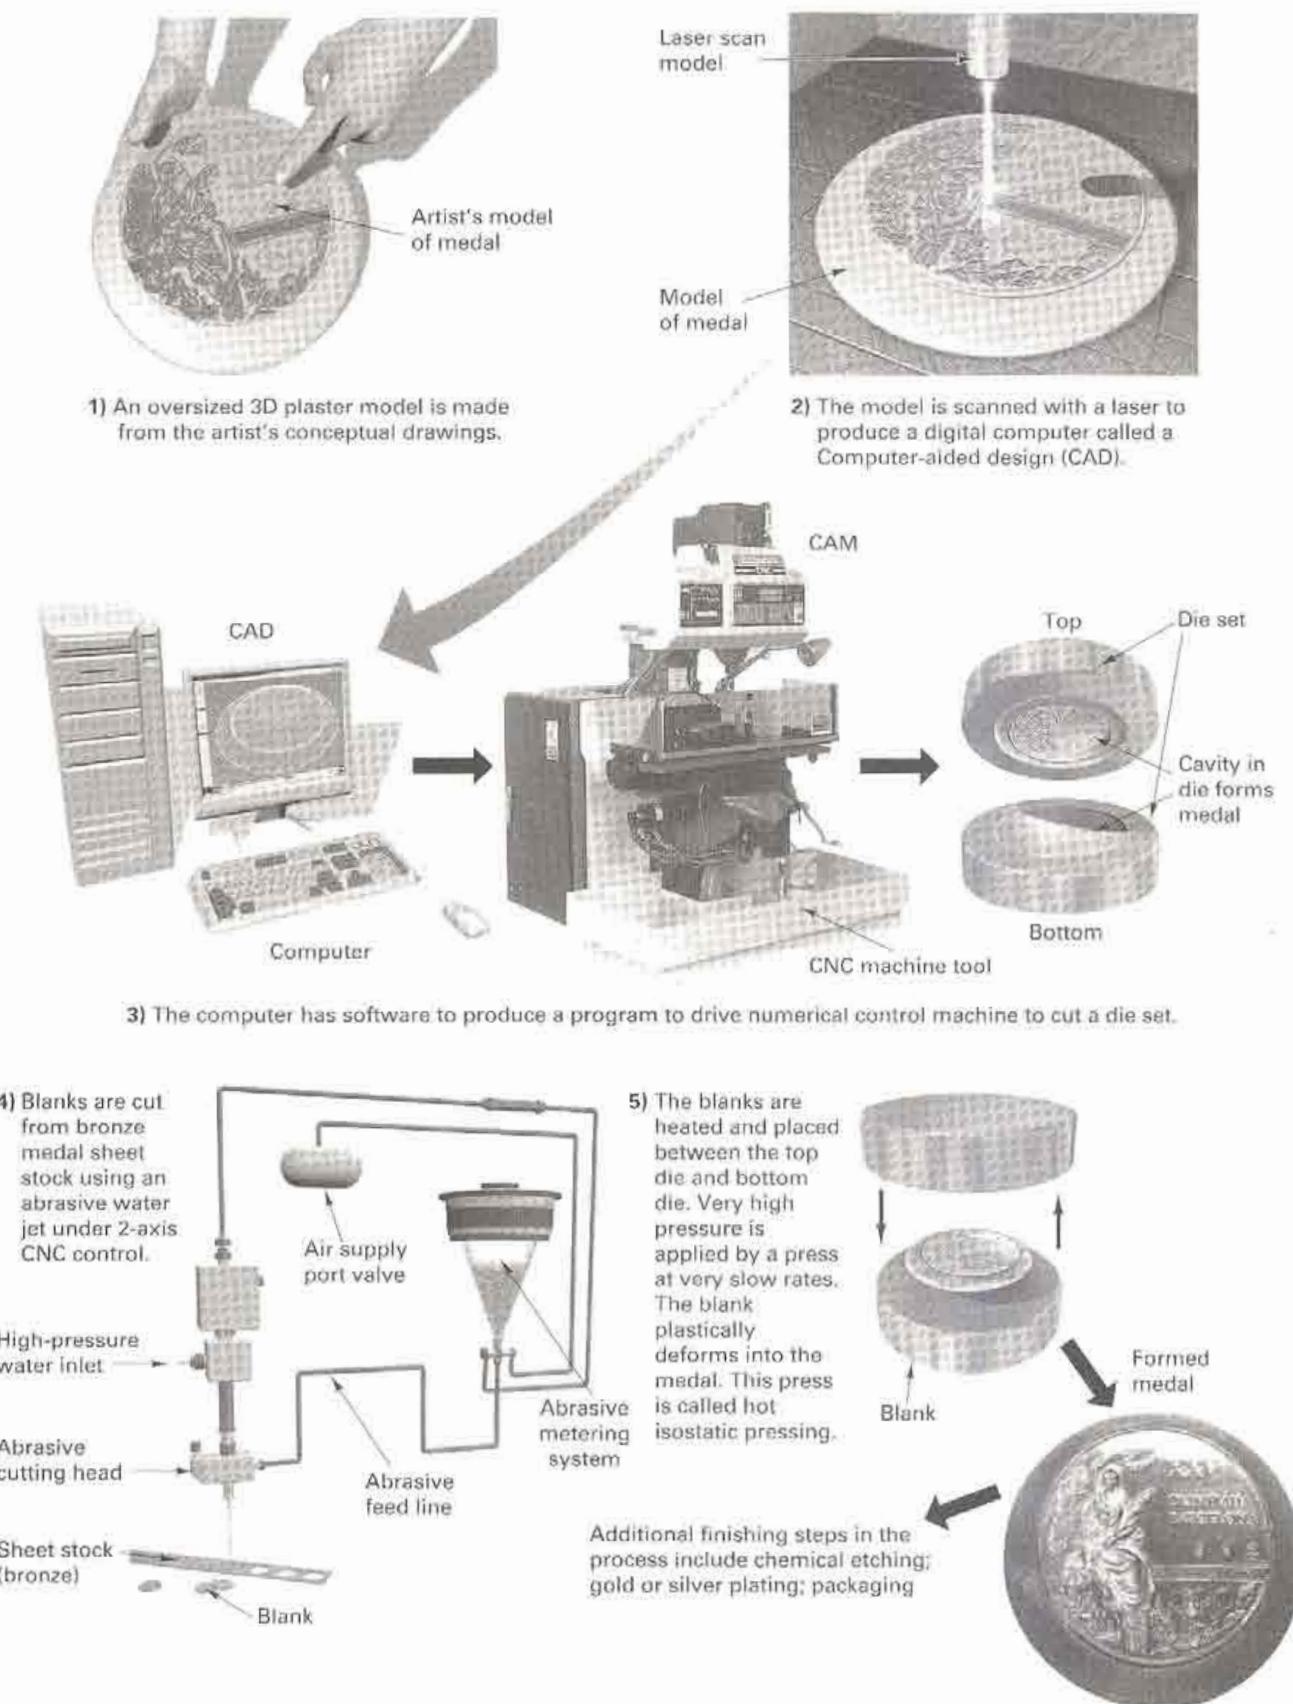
The manufacturing process for making Olympic medals has many steps or operations, beginning with design and including die making.
